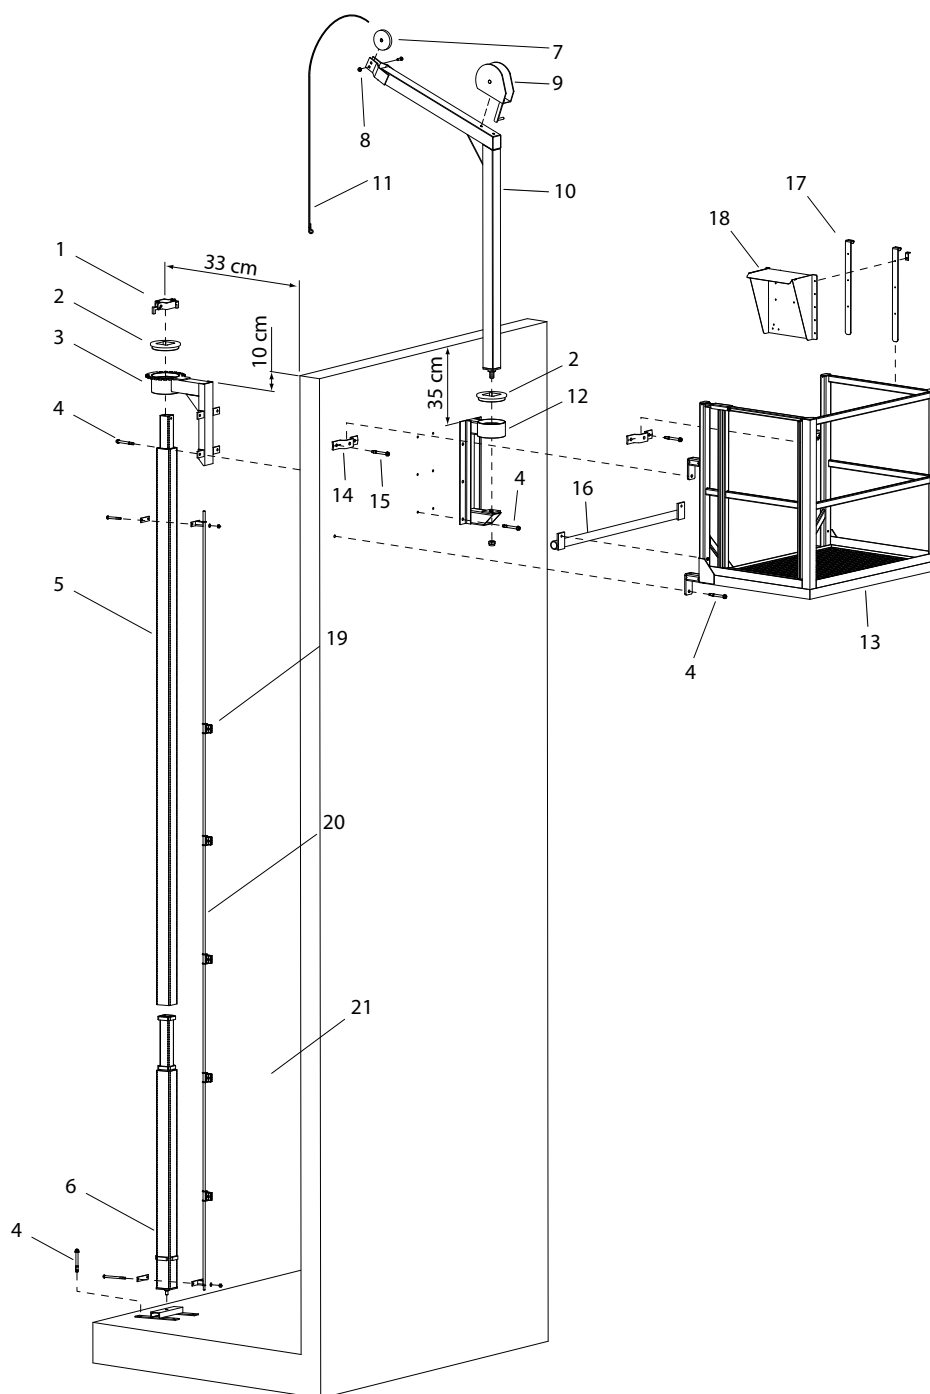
Structure of EV5 suspension mounting frame with cable guide and work platform
